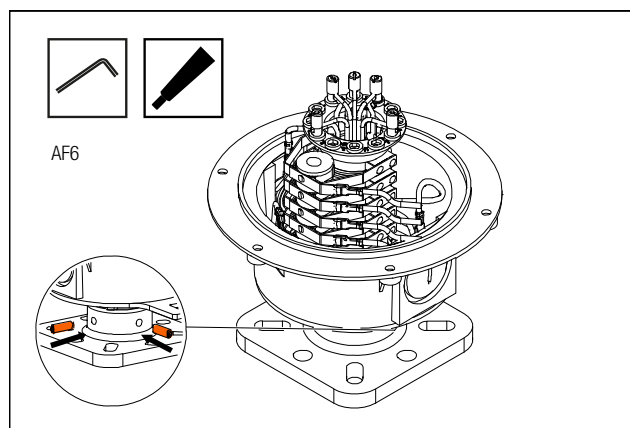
Clean set screws to remove dust and grease and apply Loctite 243. Align flange so that the countersink in the axle tube is visible. Tighten set screws.
